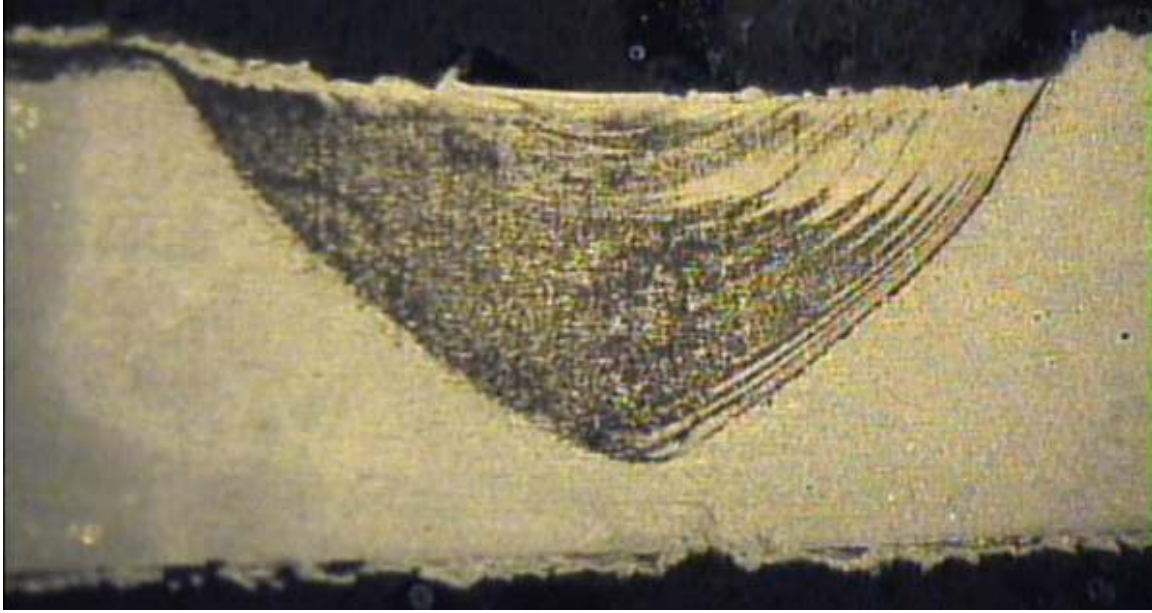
Macrosection of the weakest 90° conical weld (90°, 1400rpm, 4ipm, Run#1). Failure occurred at the jointline and along the retreating side weld nugget boundary. A significant lack of penetration (weld root) defect can be seen in this weld indicating a slight error in the automated zeroing process for this particular weld. Three welds at each parameter set were performed to distinguish such outliers.
